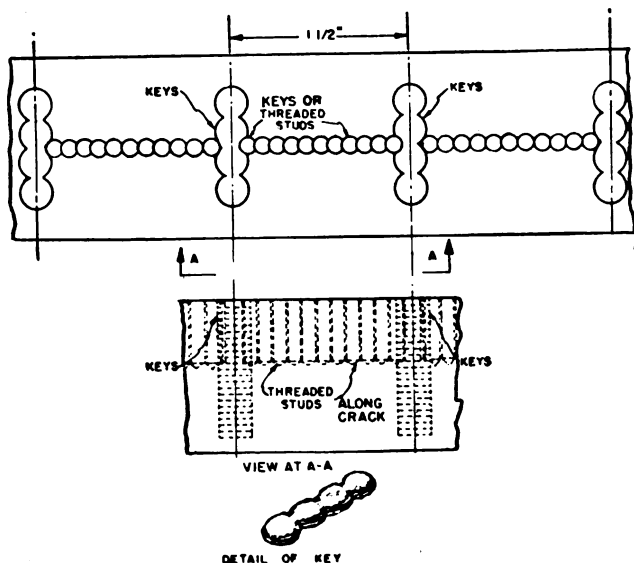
Harmon Sav-A-Weld method for repairing cracks.
